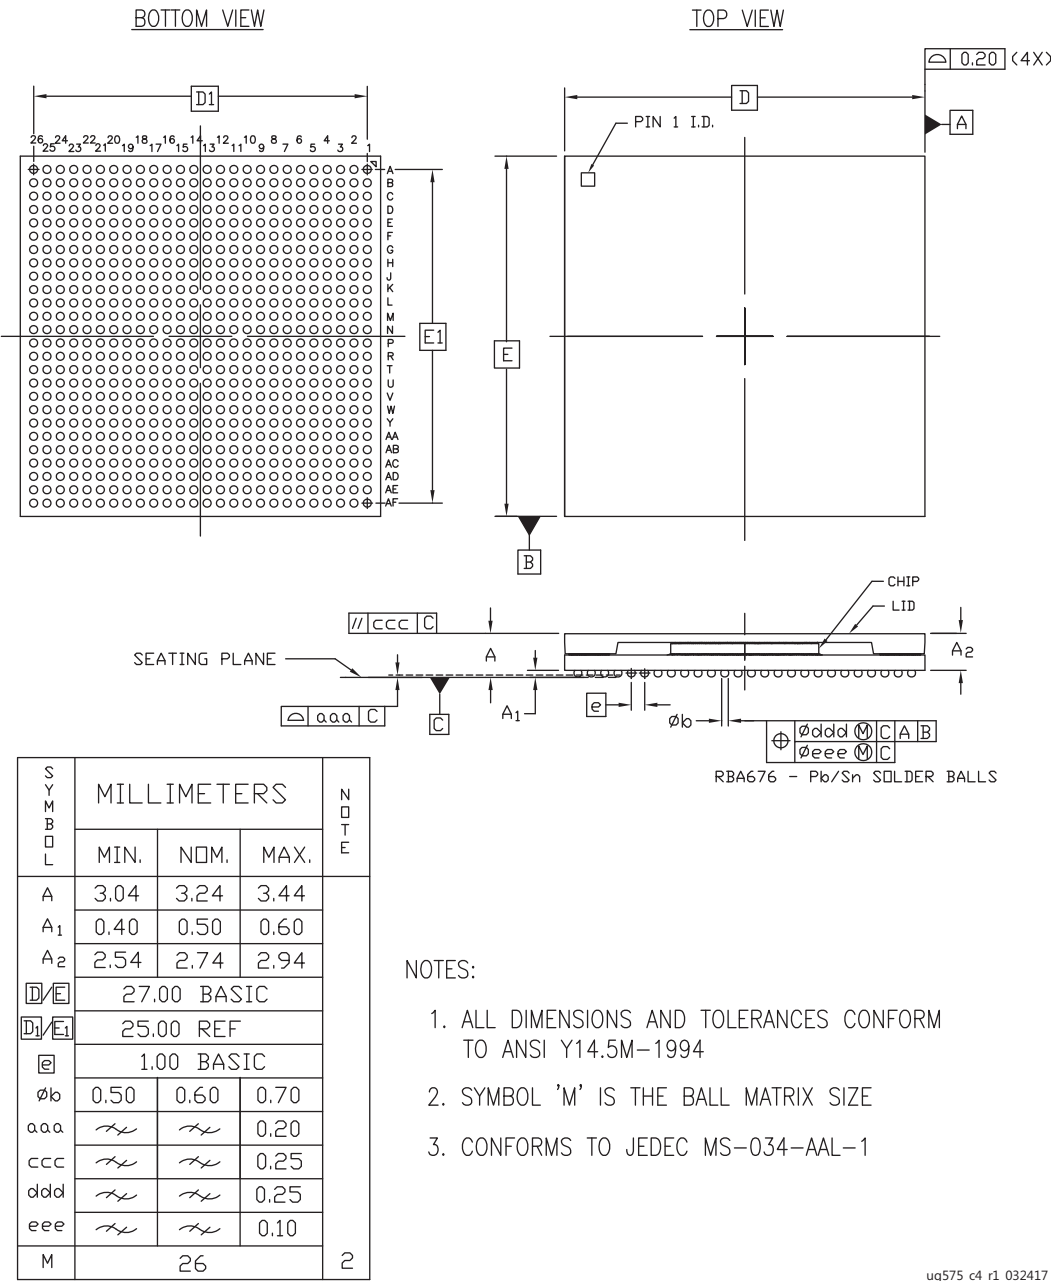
Package Dimensions for RBA676 (XQKU040)
